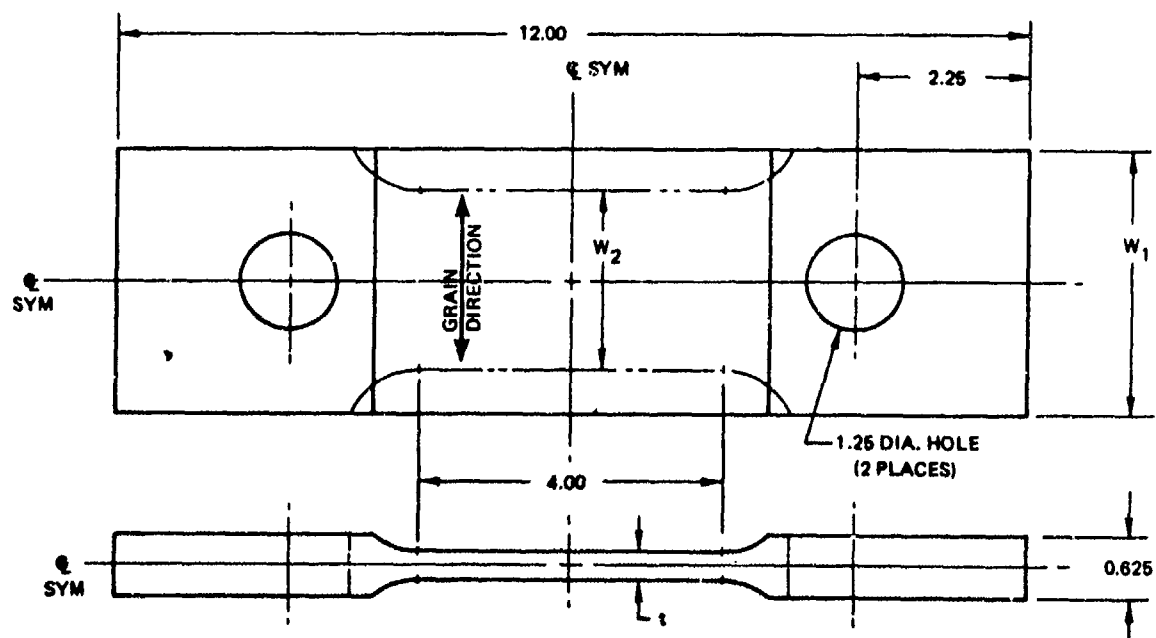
Surface Flawed Specimen Configuration For 7075-T651
